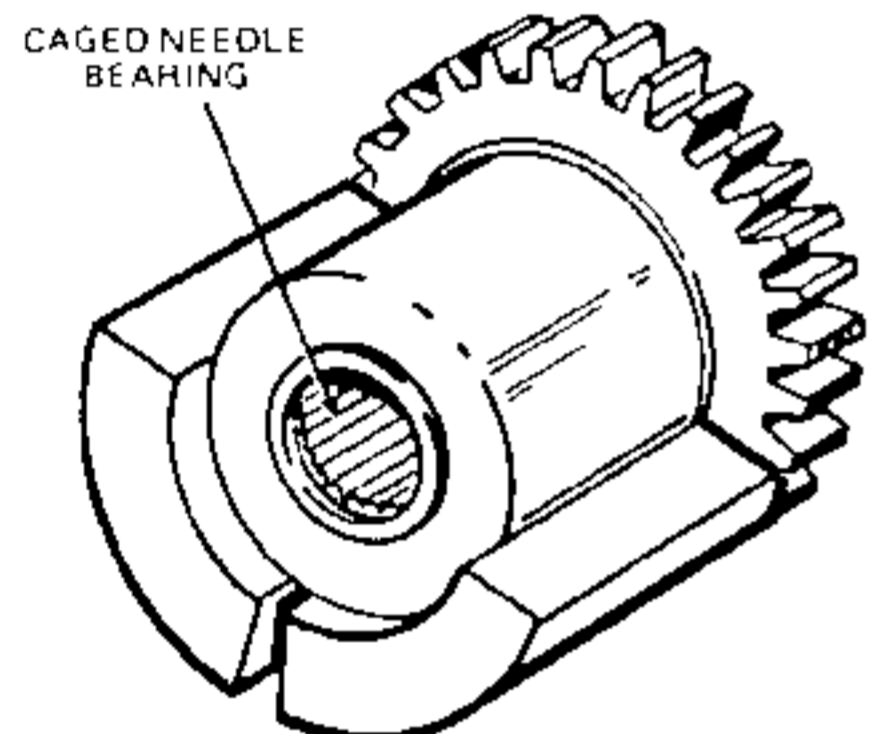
Using tool #670210, press new needle bearings into Model HM80, VM80, HM100 or VM100 balancer gears until bearing cage is flush to 0.015 inch (0.381 mm) below edge of bore.
